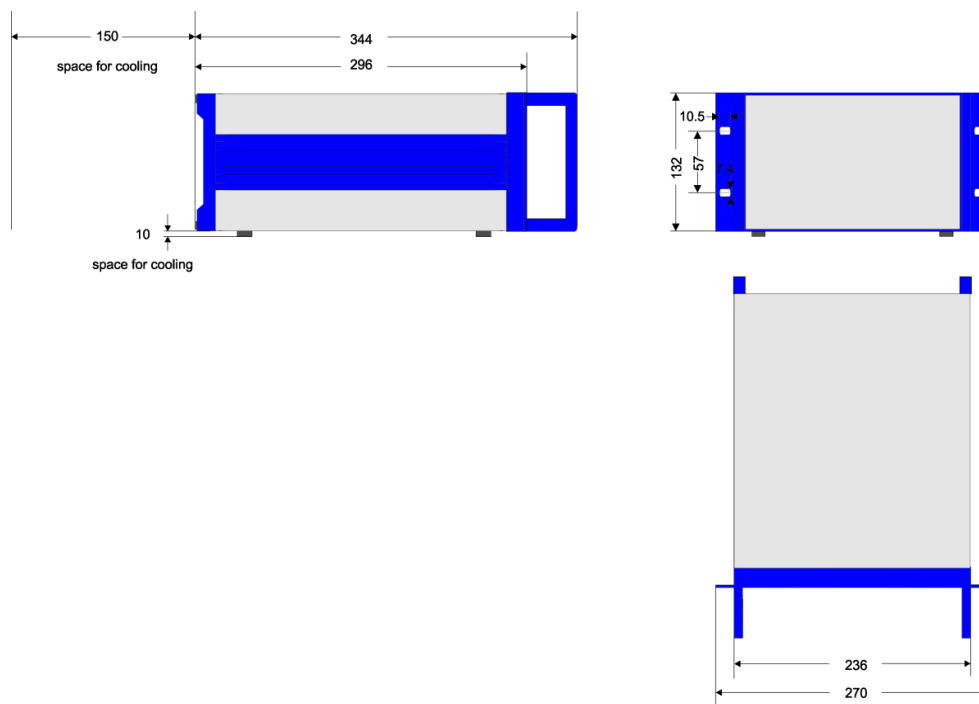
E-712.R1 and E-712.R4 dimensions in millimeters
